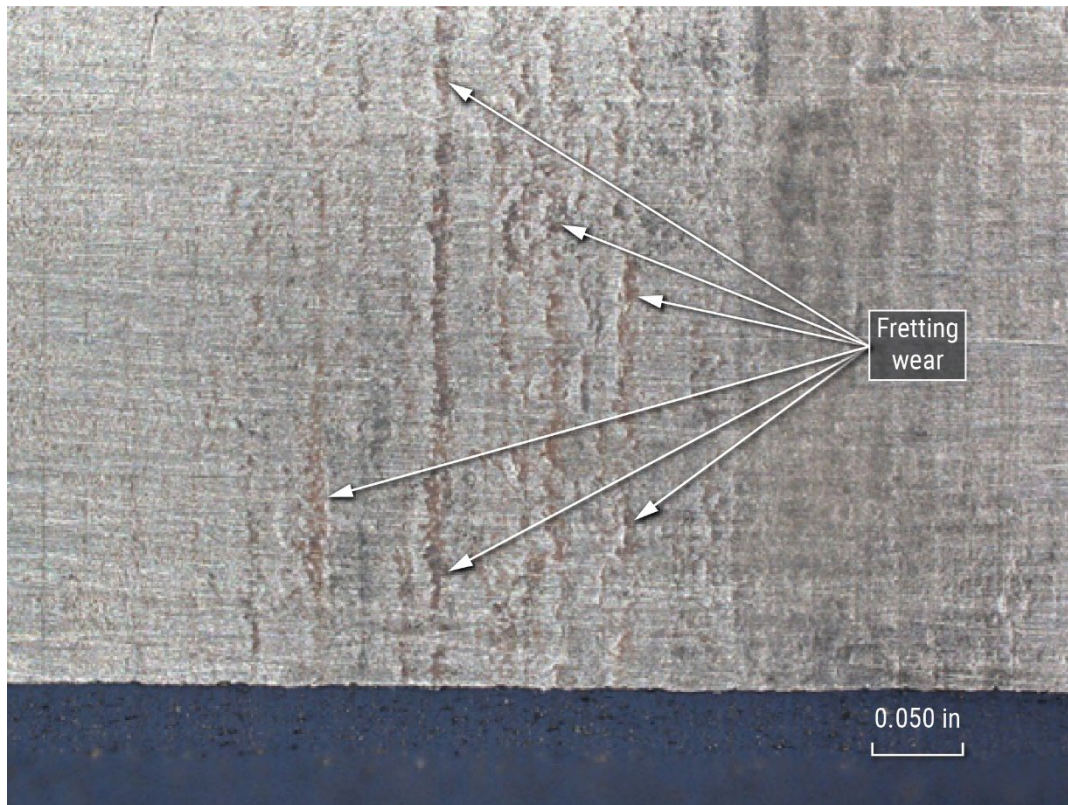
Close-up of the most severe fretting wear on the right-side axle wheel seat.
